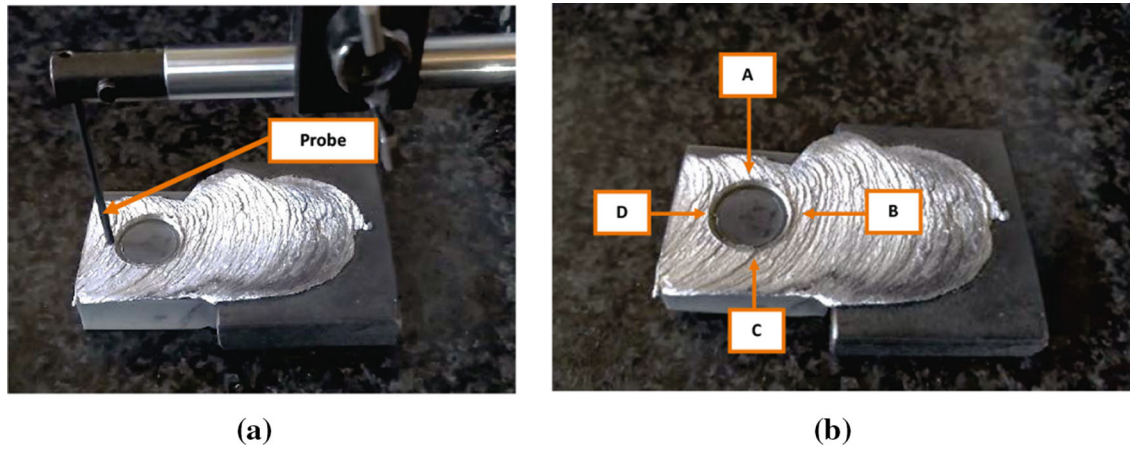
Measuring instrument showing (a) probe and (b) coating thickness measurement points.
